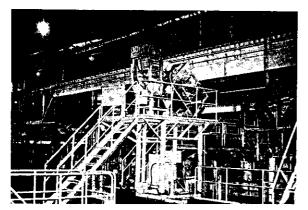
Outside diameter and length measuring equipments installed after sizer
